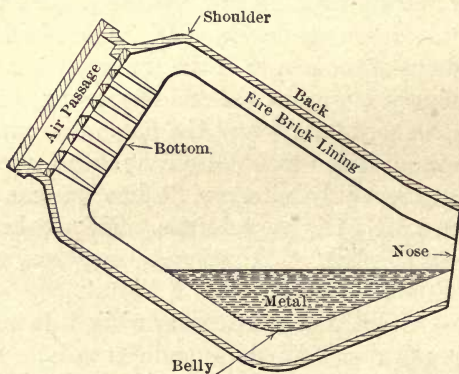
Bessemer converter tilted to pour finished metal into ladle.
